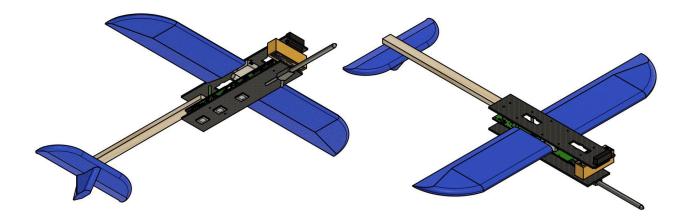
Assembled Glider Isometric Projection in Autodesk Fusion 360 CAD
